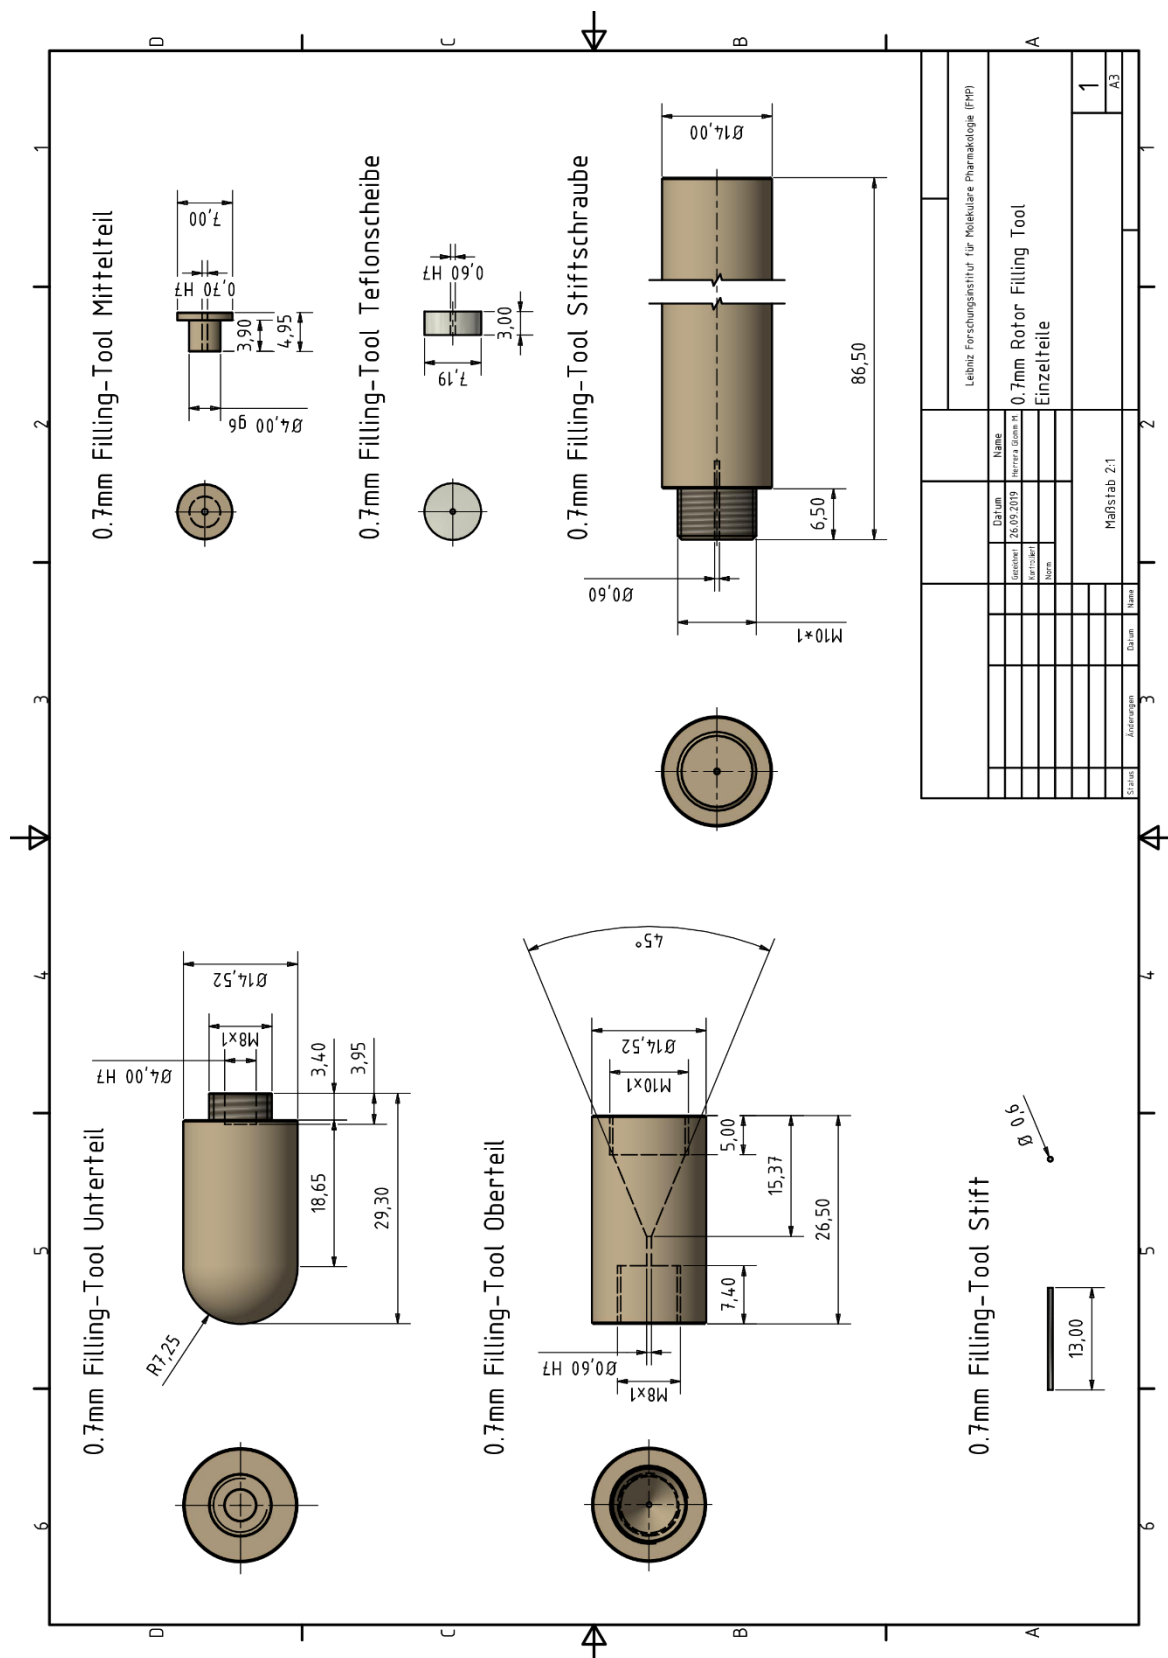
Technical drawings of the 0.7mm filling tool, detailed view.
